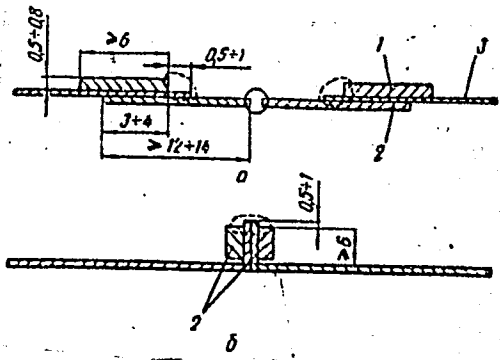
Butt joints of syphons or thin plates welded with the aid of:
